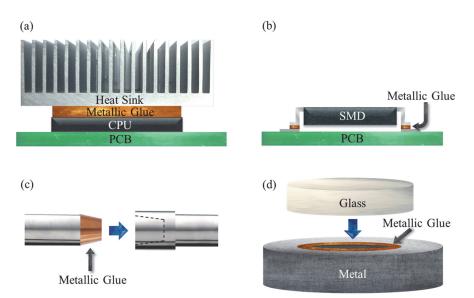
Various applications of metallic glue: (a) A central processing unit (CPU) on a printed circuit board (PCB) connected to a heat sink, (b) a surface mount device attached to a PCB, (c) a press-fit pipe fitting for environments where welding is dangerous or impossible, and (d) a glass plate attached to metal with a different coefficient of thermal expansion to cover a cavity with a hermetic seal.
